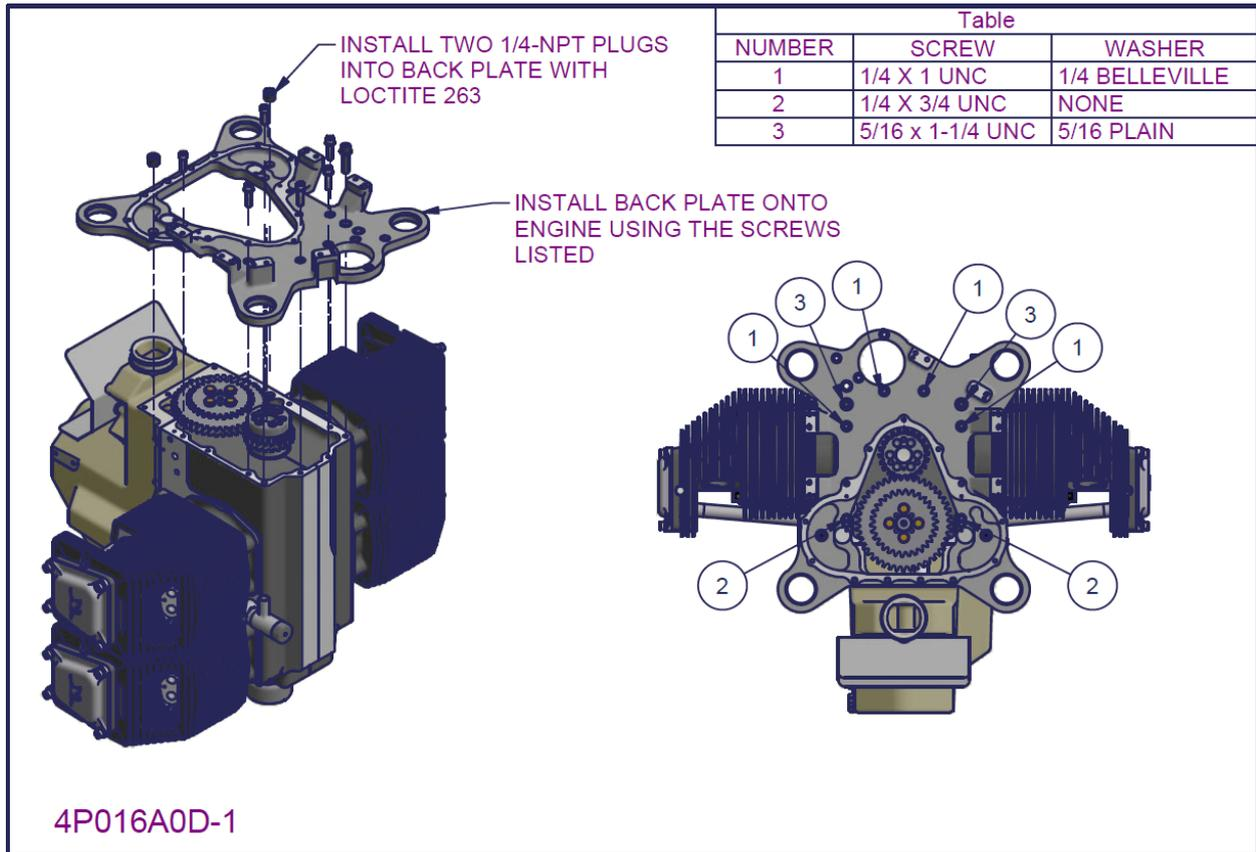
2200/3300 back plate and distributor gearbox installation 2
